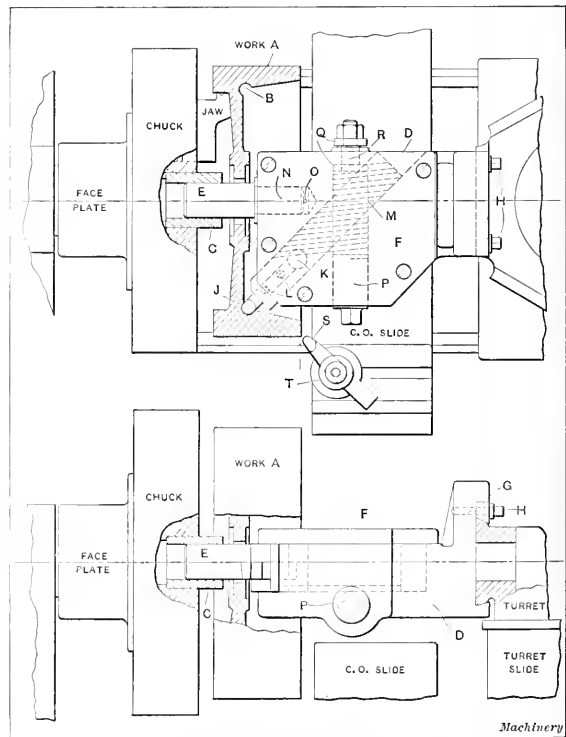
A Recessing Tool used in machining an Automobile Flywheel
